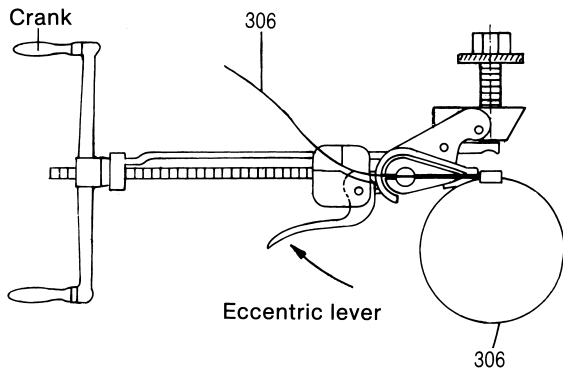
Clamping the joint clamp by means of clamping tool Band-It and adapter J050.
